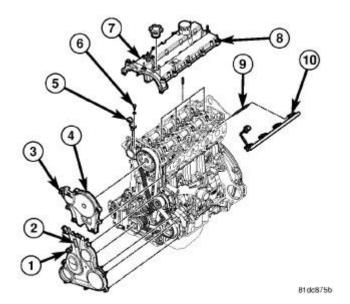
CYLINDER HEAD COVER Courtesy of CHRYSLER LLC
